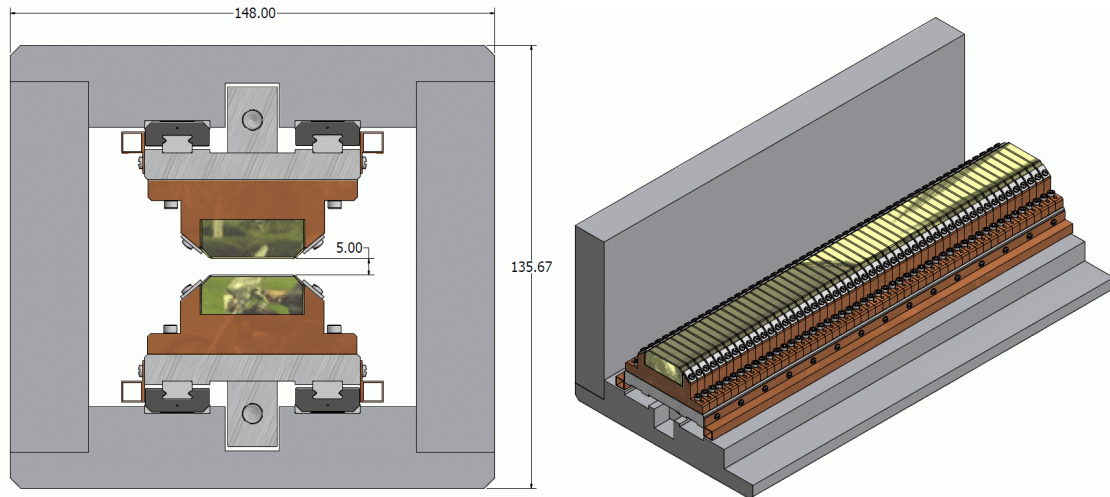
Cross-section and internal view of the proposed undulator magnets. Dimensions are in mm.
